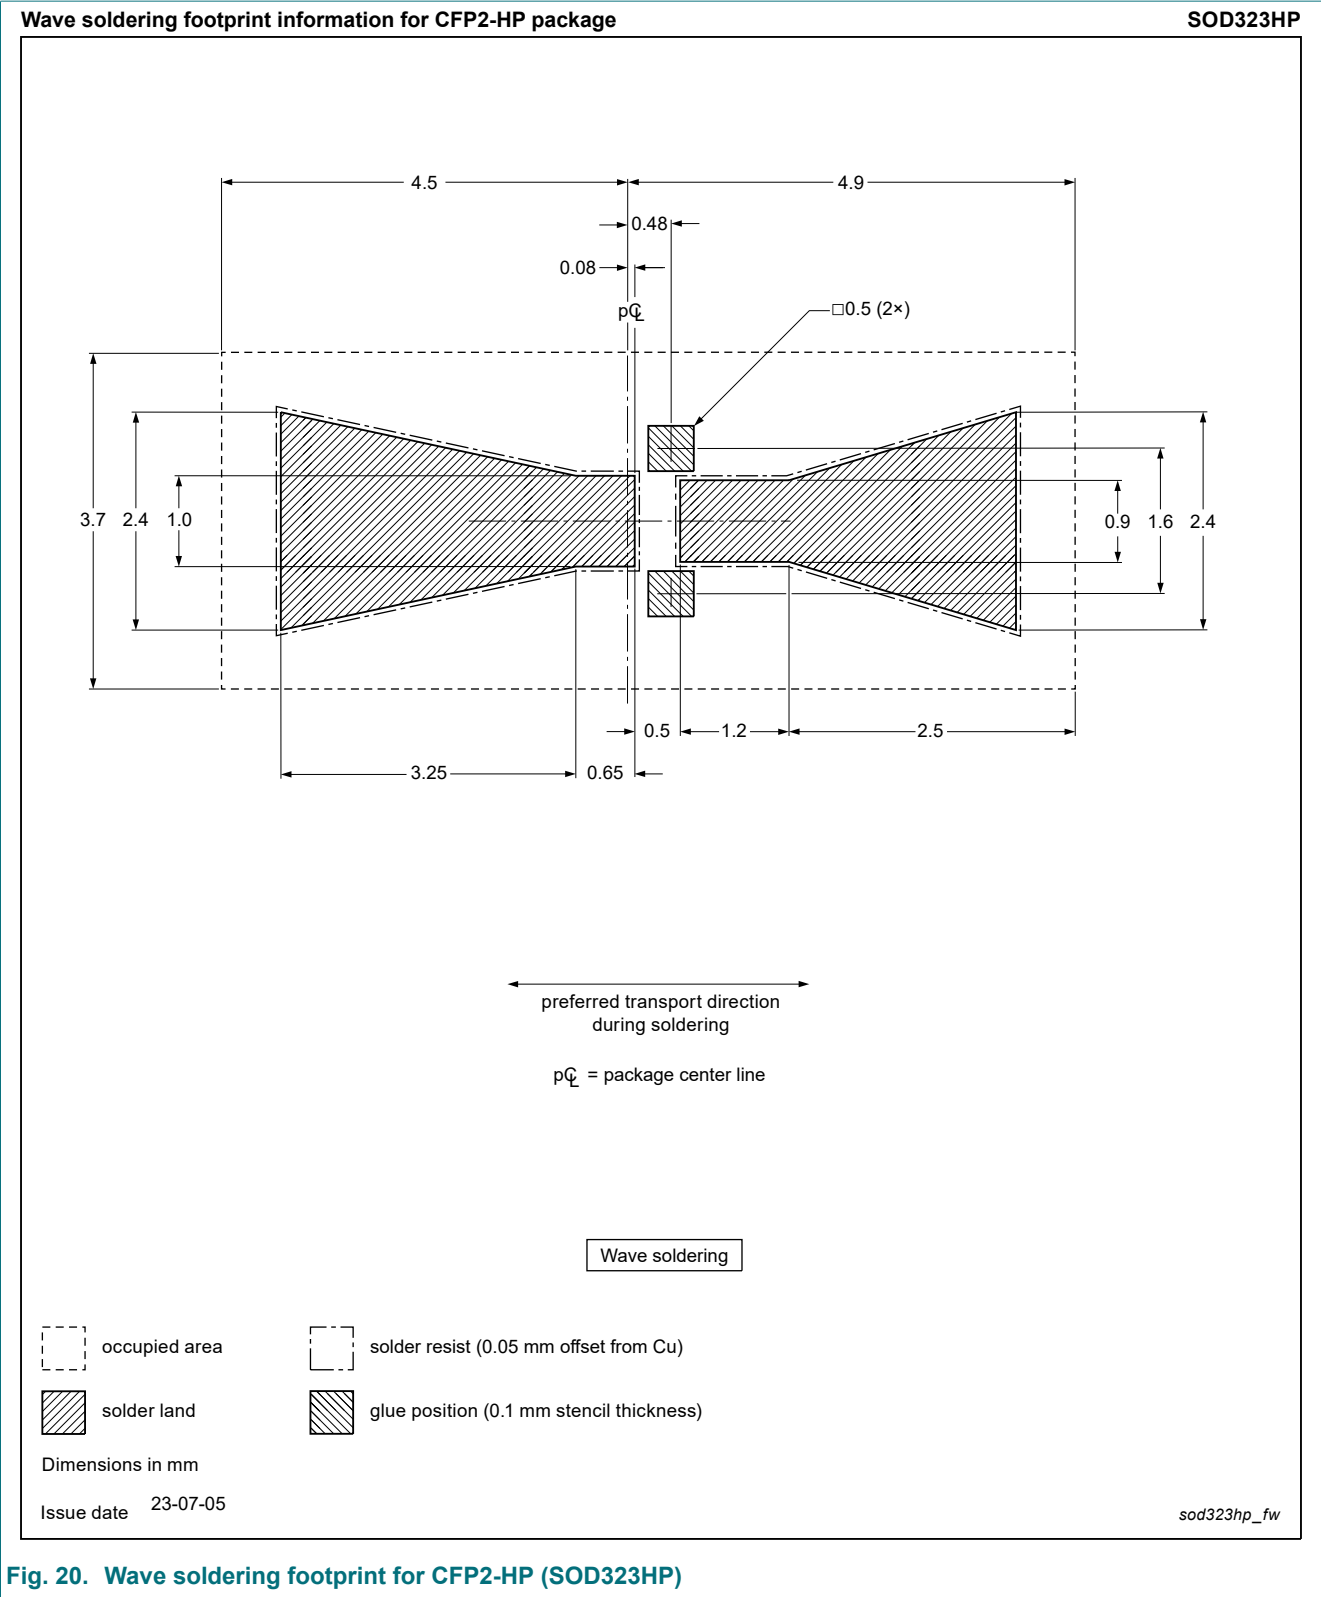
Wave soldering footprint for CFP2-HP (SOD323HP)
